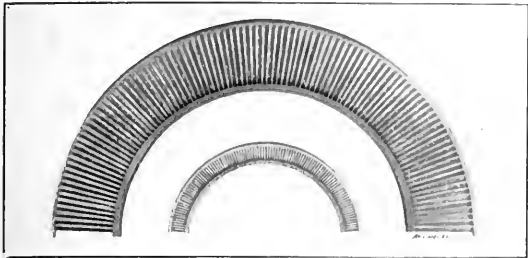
Two Half-rings of Blades—the Largest and the Smallest in the Turbine.
